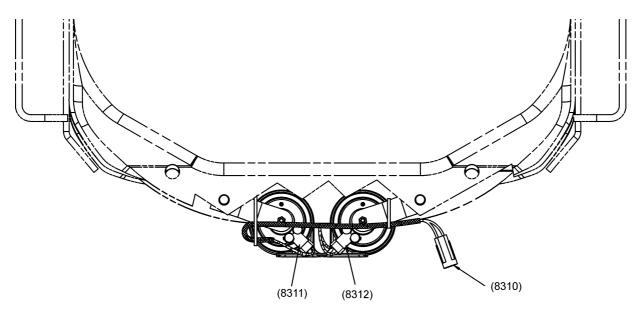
Electric Horn FWD Chassis Wiring Crossmember
